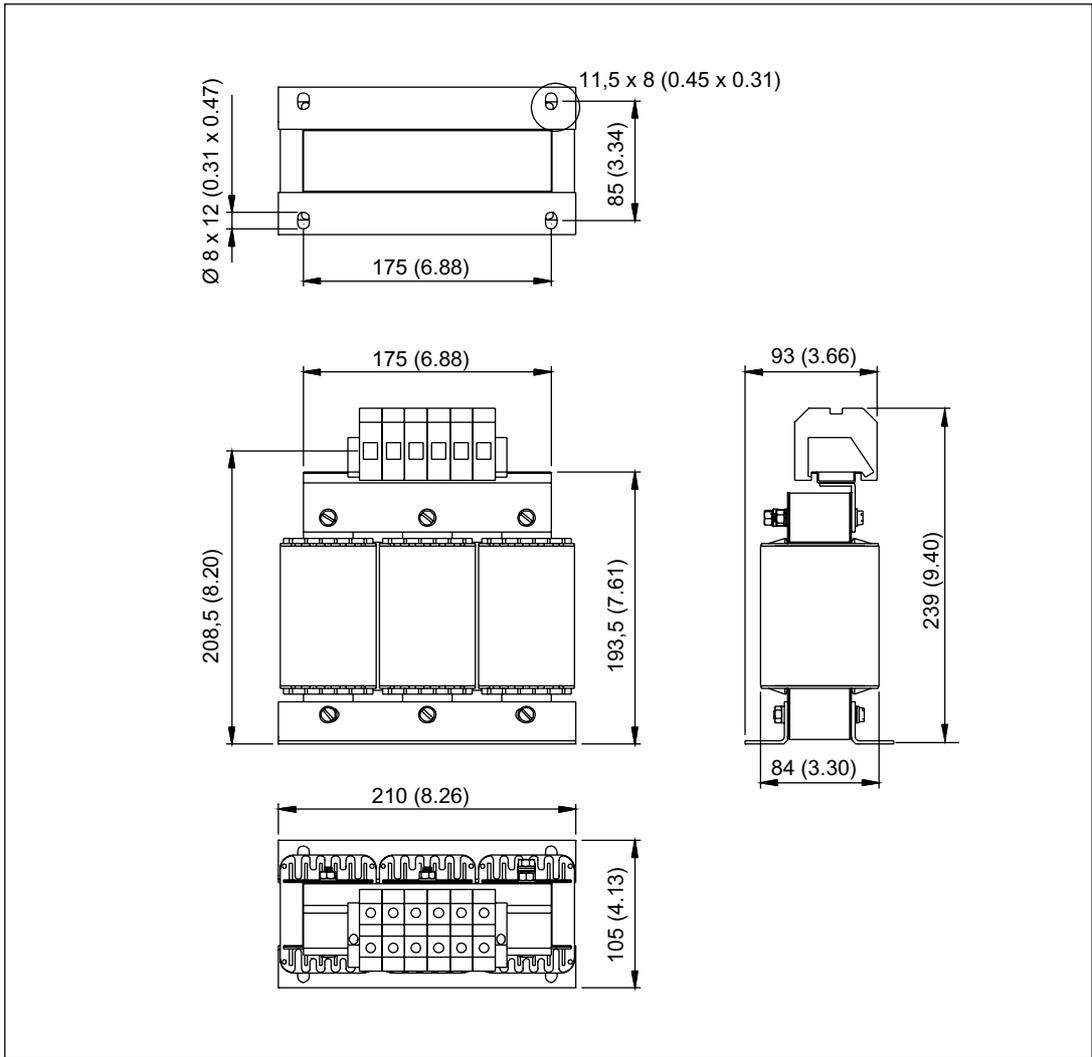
Dimension drawing of line reactor for Basic Line Module 40 kW, all dimensions in mm and (inches)
